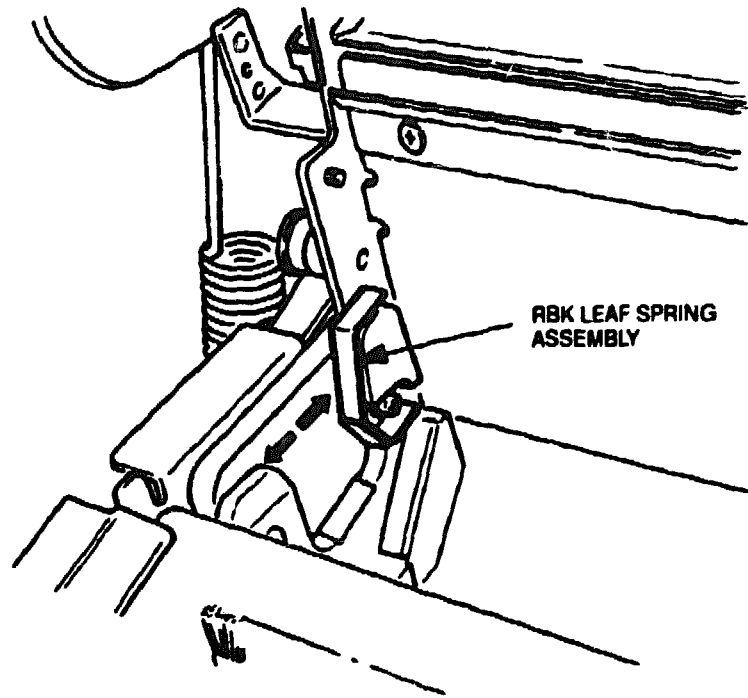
RBK Leaf Spring Assembly Adjustment
